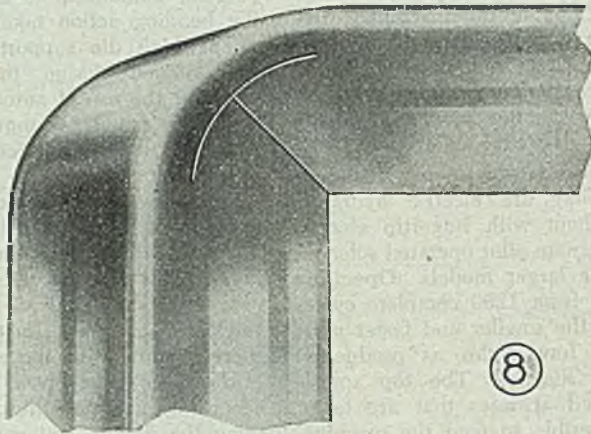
For exceptionally wide flanges of the type shown here, the notch may be located so that any welding or finishing required is confined to the flat surfaces
